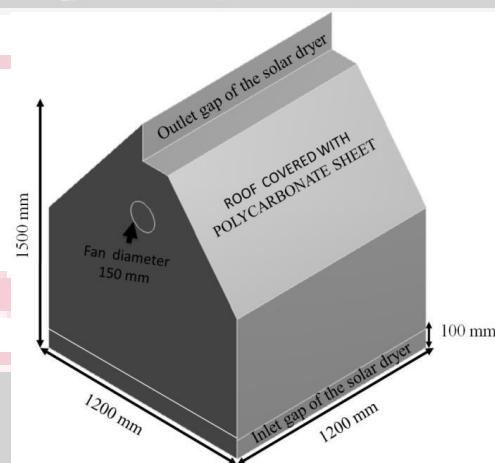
Three Dimensional CAD model of solar dryer proposed design
